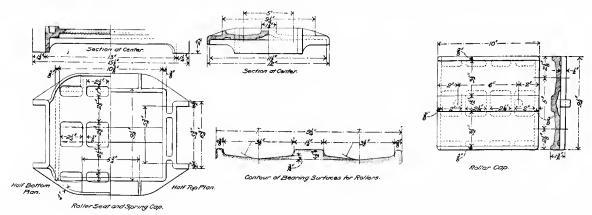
Details of Spring Caps and Seats for Barber Truck with Top Rollers. Standard Car Truck Company.
